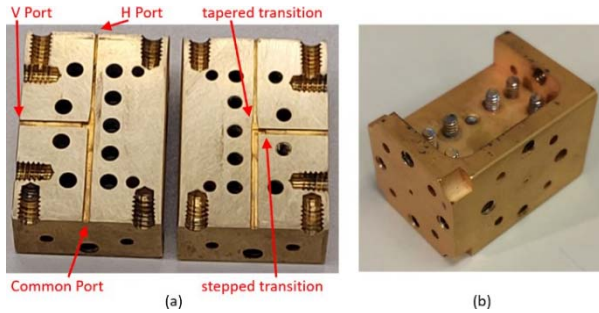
Photographs of (a) the adjoining surfaces of the two brass blocks with the tiny milled waveguide features highlighted and (b) the finished OMT after assembly and gold plating.
